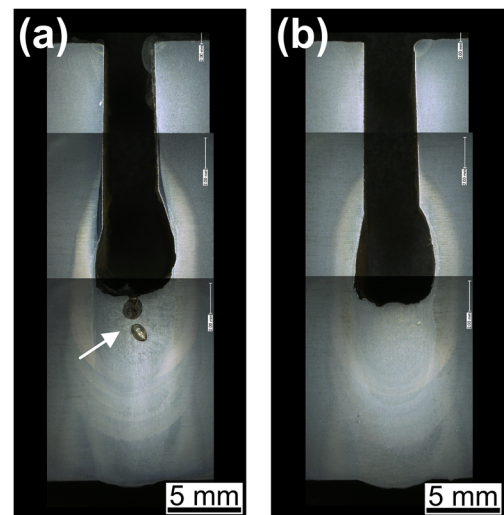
Effect of the shielding gas method on multi-pass laser welding with filler wire addition: a 5 mm diameter tube inside groove and b 15 mm diameter tube on the top of the groove
